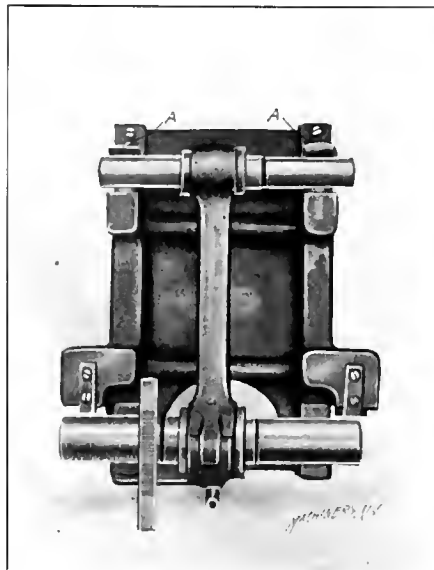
Fixture for Testing the Parallelism of Connecting-rod Bearings
